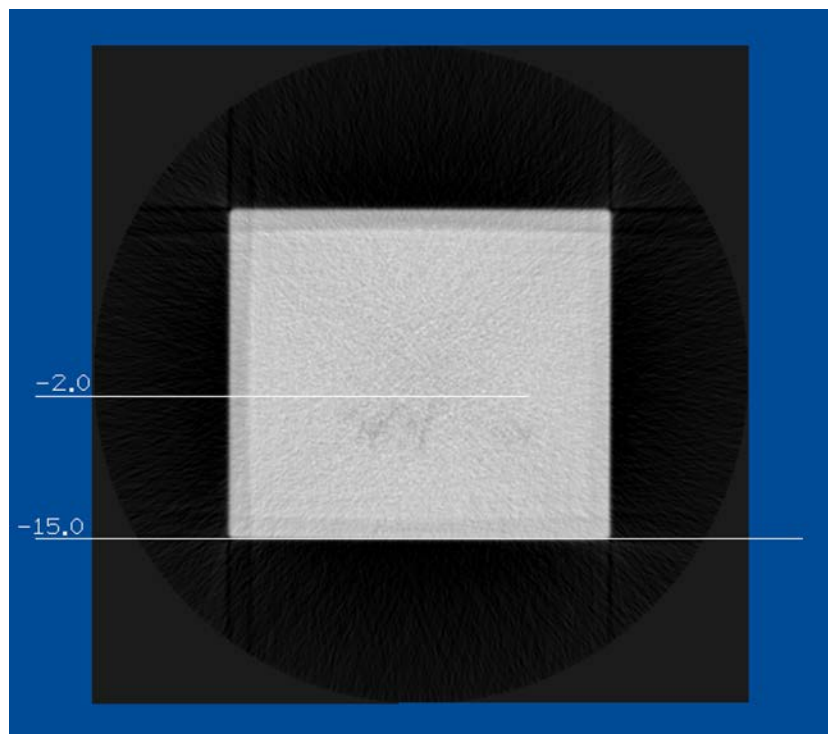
CT-slice #26 ($z=113.64$ mm) of test block P29 (N 220 AD U 10), crack depth: 13.0 mm (+/- 2 pixel = 0.24 mm), 42.9% of weld thickness
